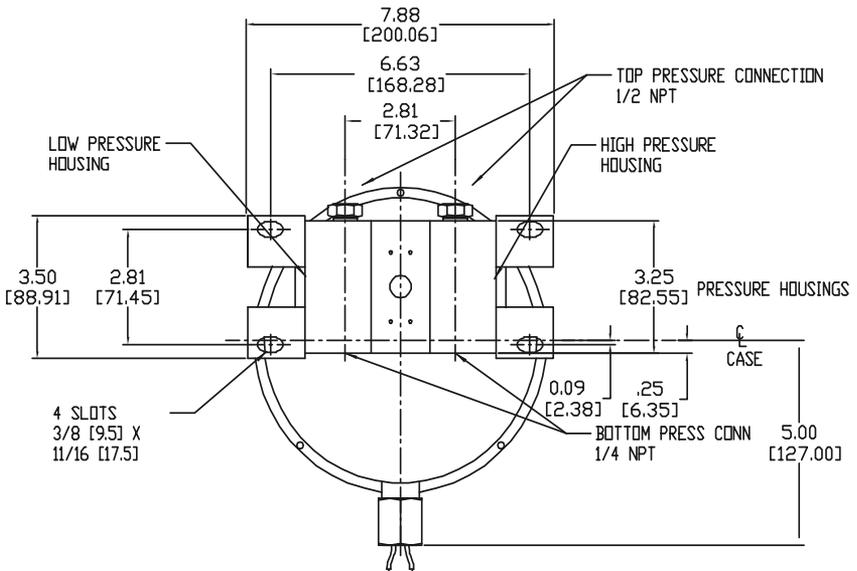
764 transmitter, rear view (connector assembly not shown)
